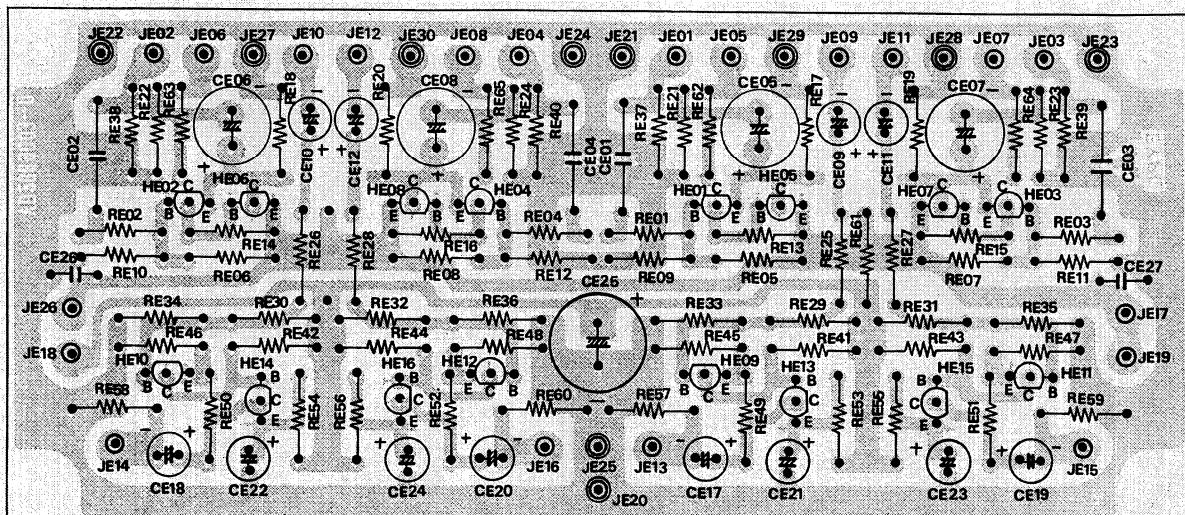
Buffer & Pre-Amplifier Assembly PE01 Component Locations
